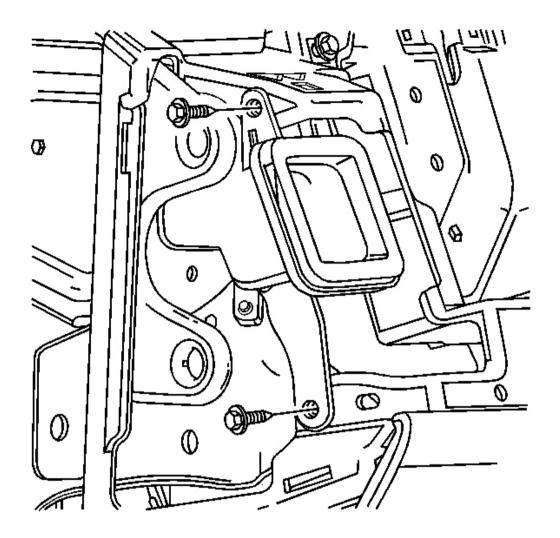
LH Air Outlet Duct Courtesy of GENERAL MOTORS CORP.
